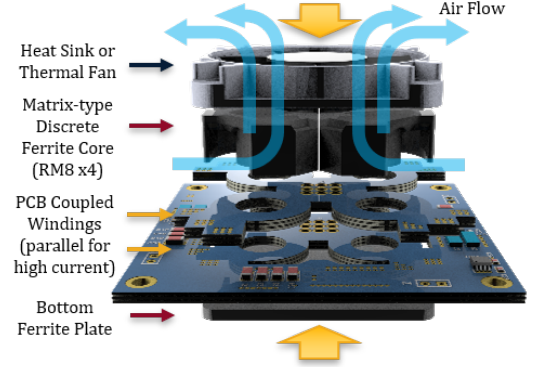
Circular and cross matrix-type coupled pcb winding structure
